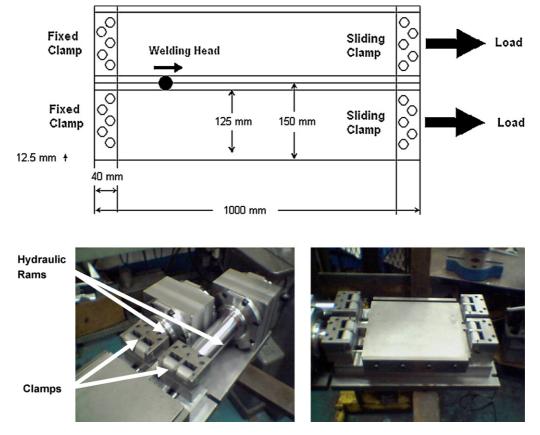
Mechanical tensioning method and equipment used to generate the sample welds.
